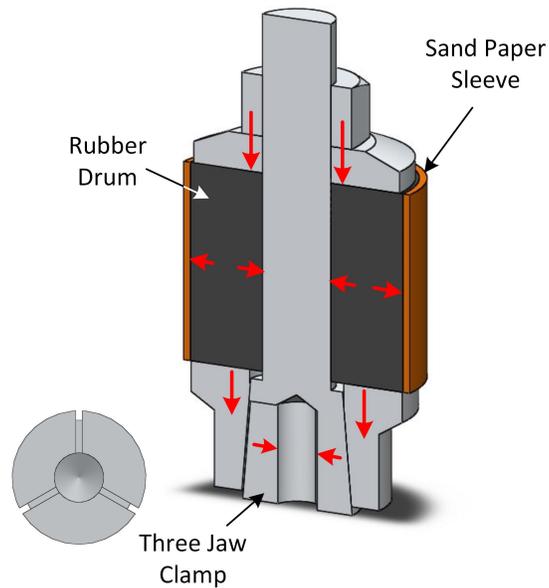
Cross sectional view of the driving wheel. The red arrows denote a compressive force flow through the rubber drum to the motor shaft.
